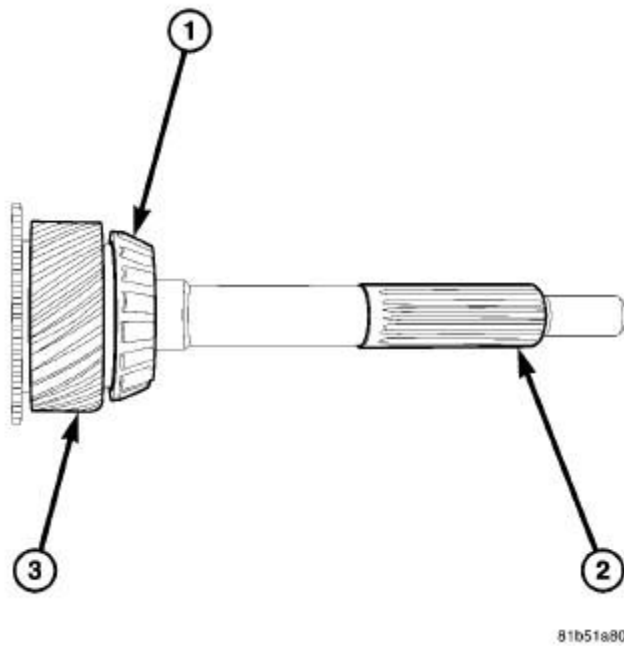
Input Shaft Bearing, Splines & Forth Gear
